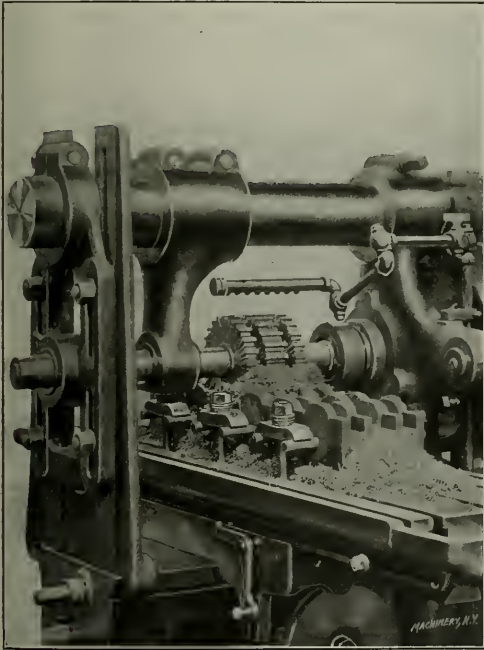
Milling Toggle Levers for Turret Lathe Chucks.
